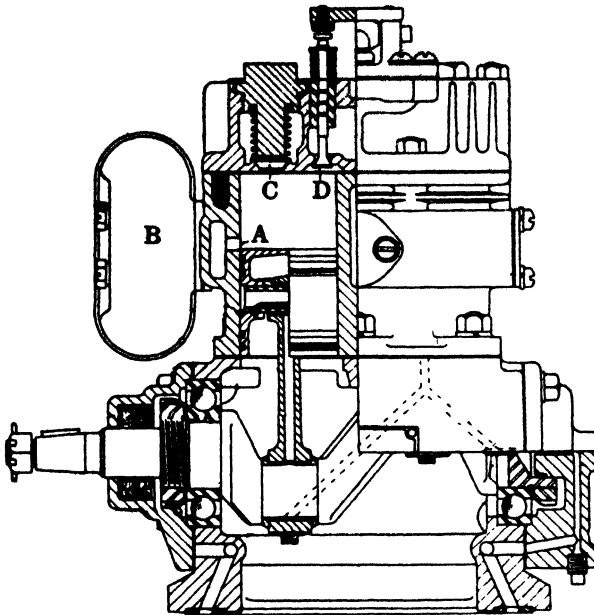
TWO-CYLINDER AIR COMPRESSOR.
